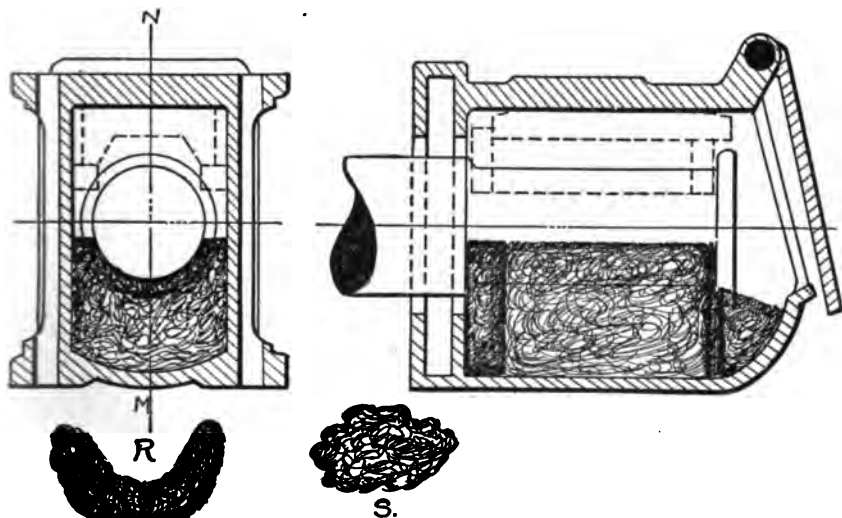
SEC. 10gg.—Method of packing railway car journal boxes.
